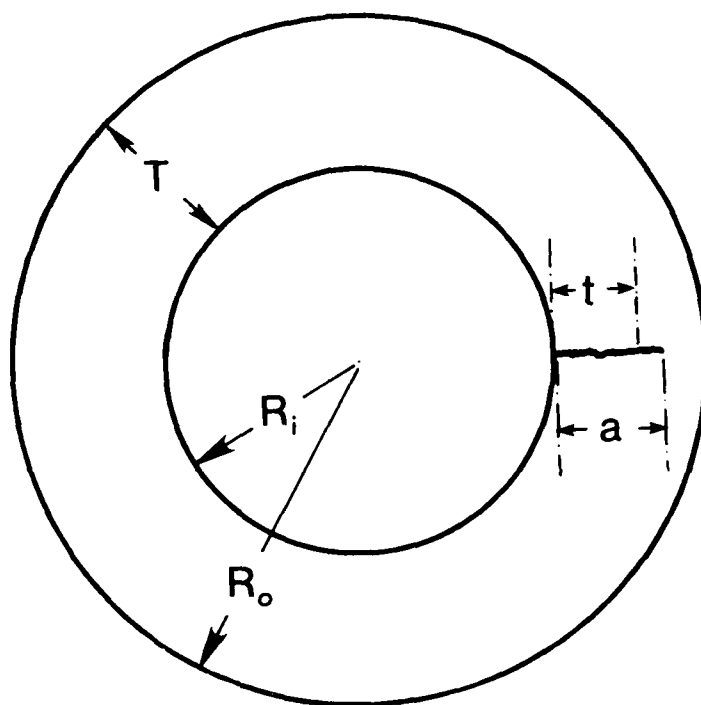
Section of a thick-walled cylinder containing a radial crack.
